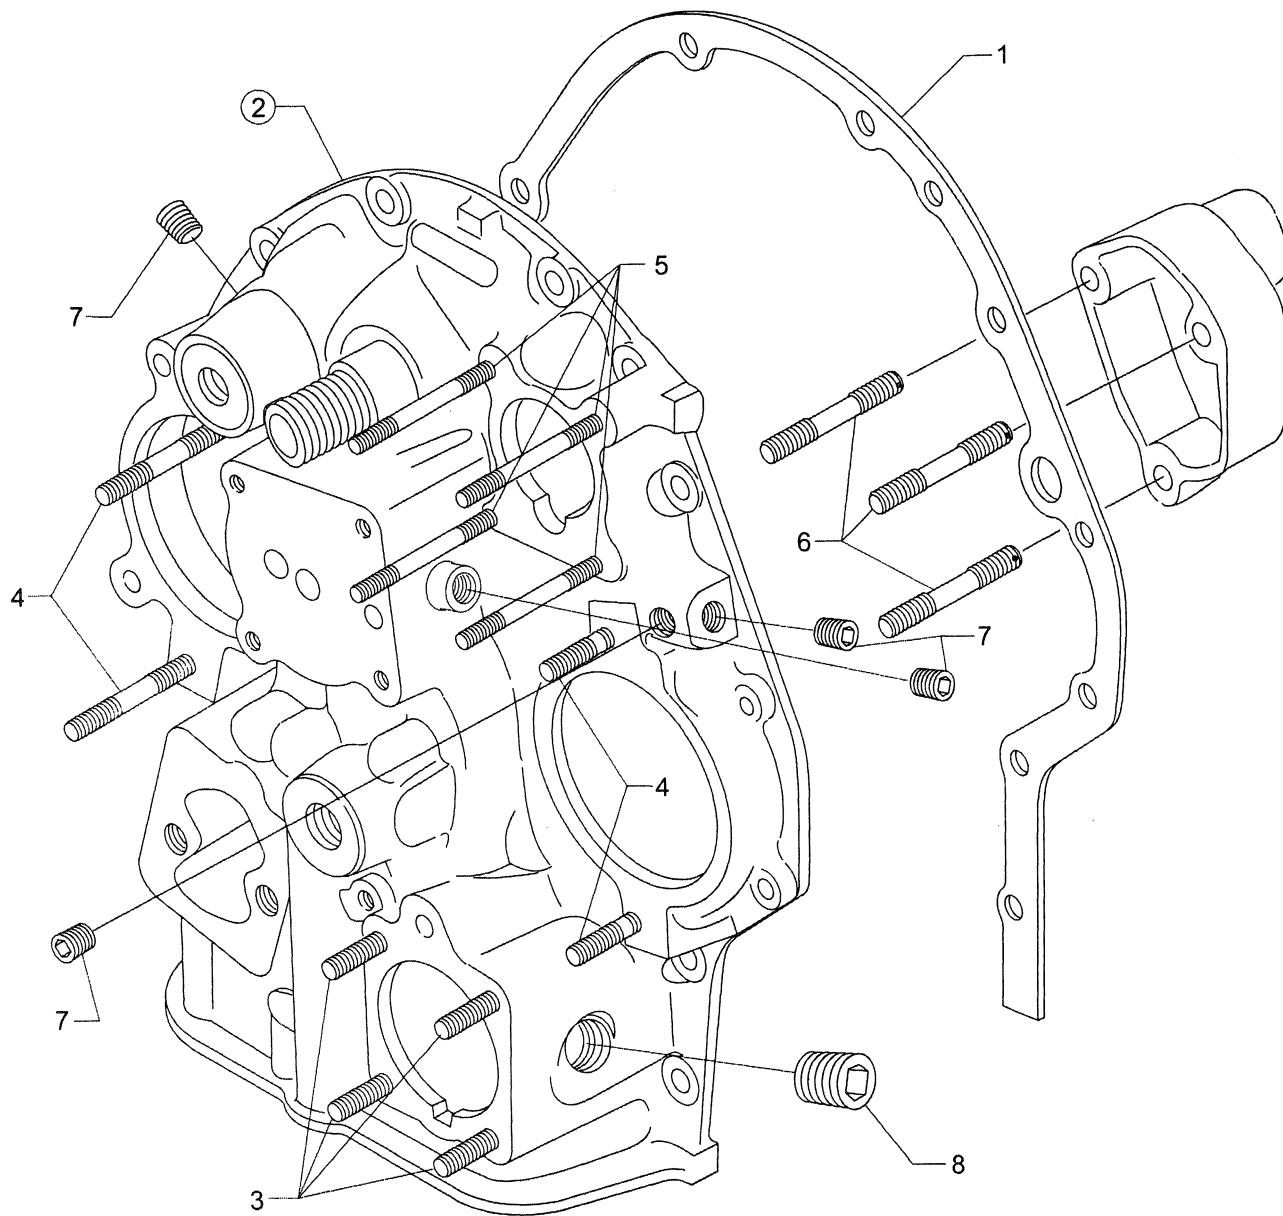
ACCESSORY HOUSING ASSEMBLY
